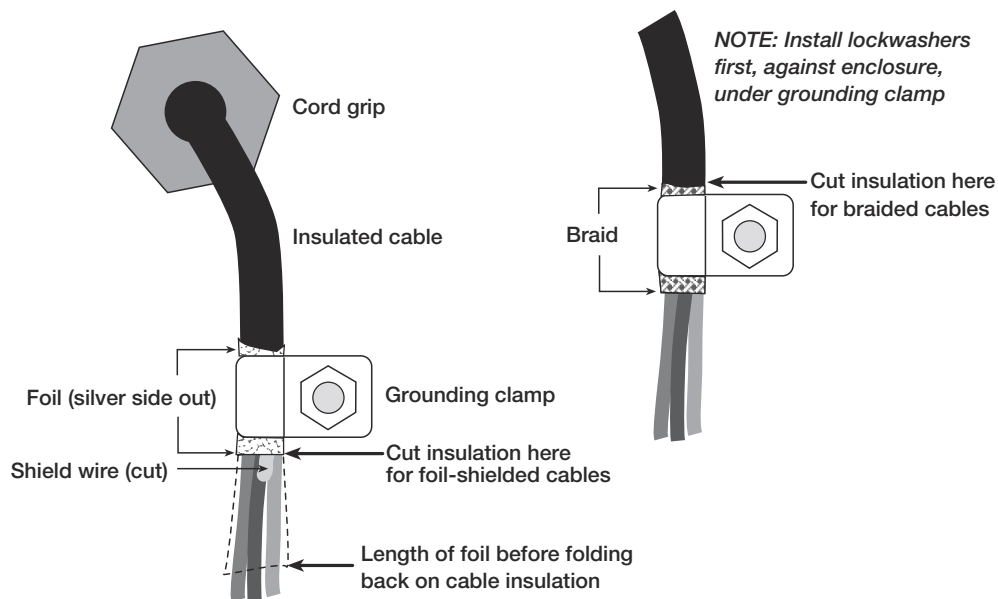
Grounding Clamp Attachment for Foil-Shielded and Braided Cabling
